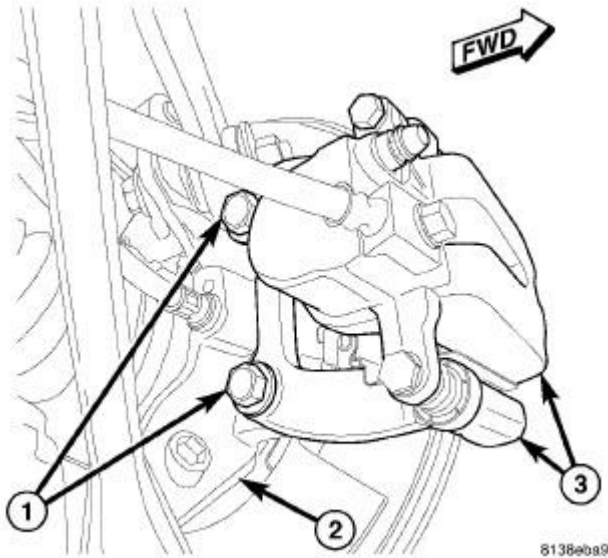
Rear Caliper Adapter, Knuckle & Bolts
